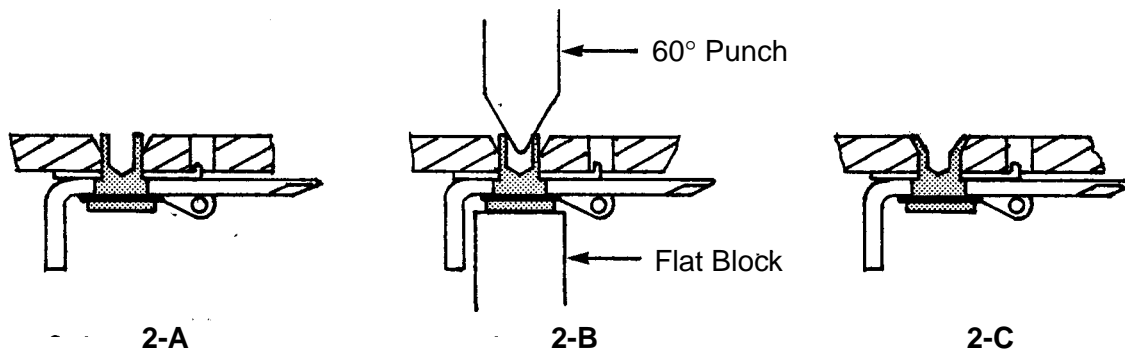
Installation of Slide Assembly with a 2R078 Rivet
